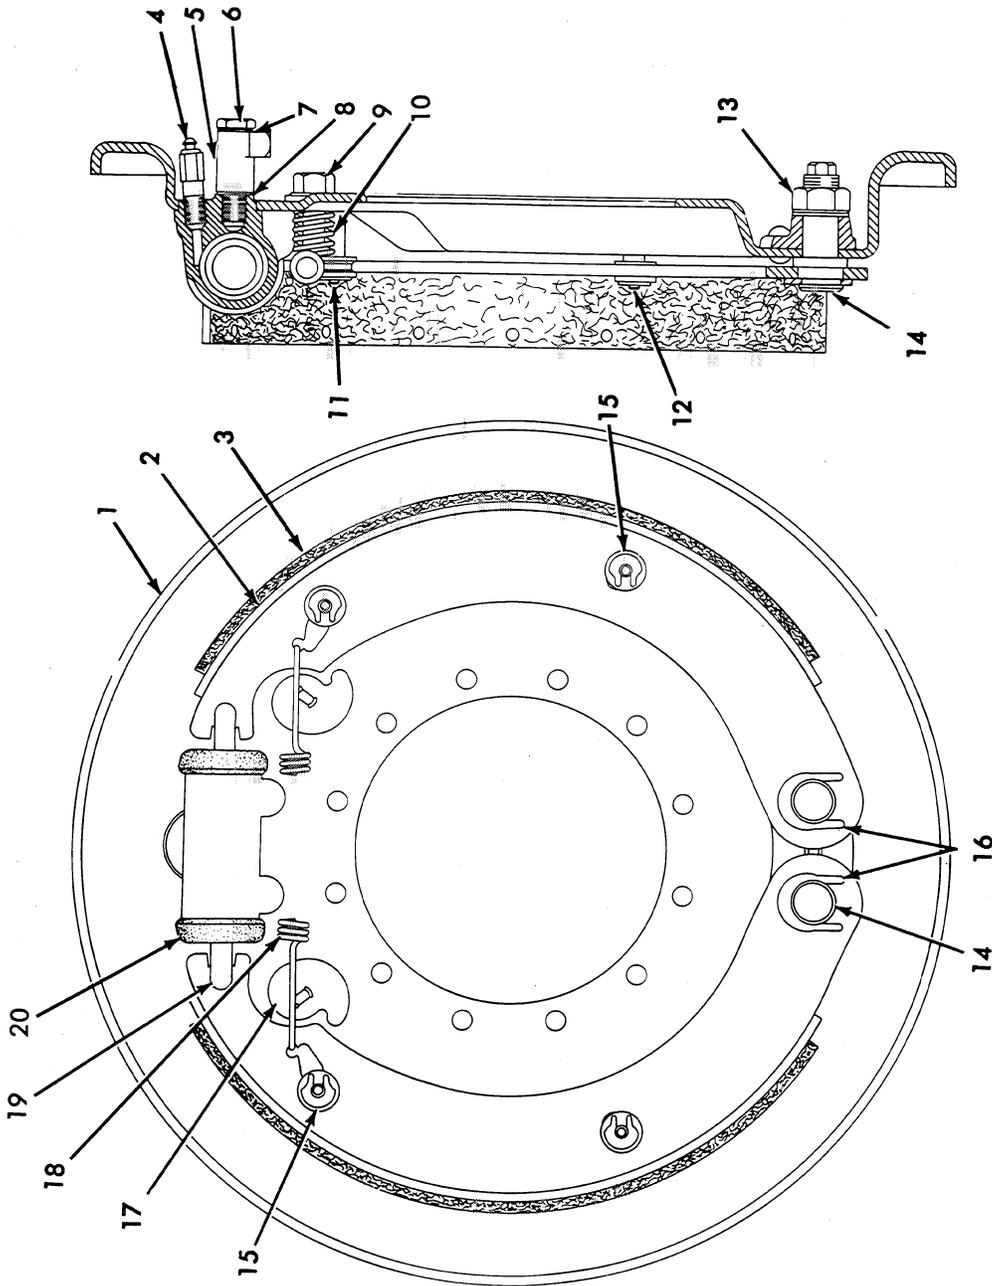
Typical Rear Brake Assembly - Cross Section View
